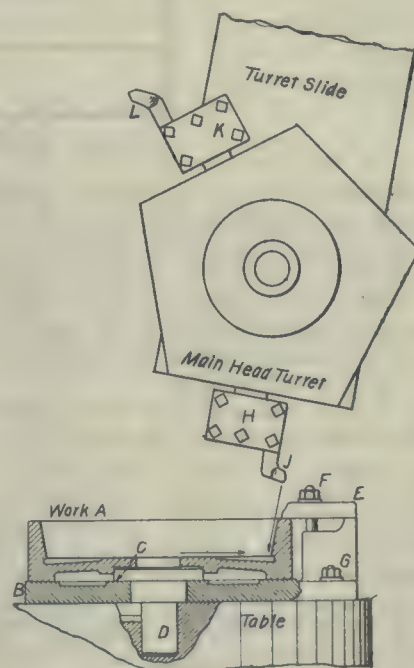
TOOL LAYOUT, SECOND SETTING.
